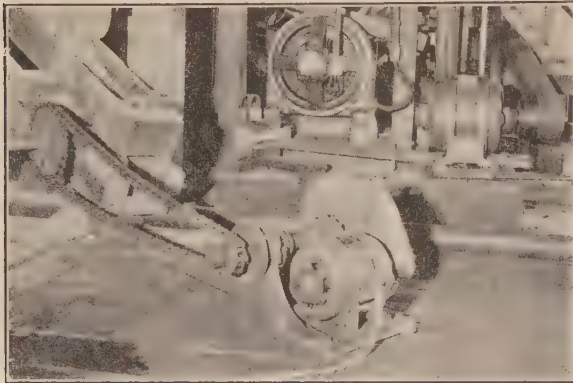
SAWDUST CONVEYER DRIVEN BY BACK-GEARED MOTOR
